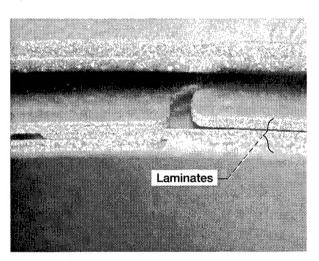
Magnified view of upstream finger pad i.d. of pressure balanced finger seal prior to endurance test.
